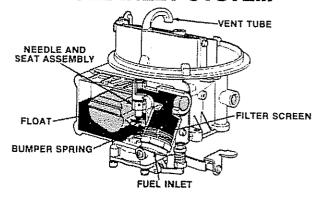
MODEL 2300 FUEL INLET SYSTEM
